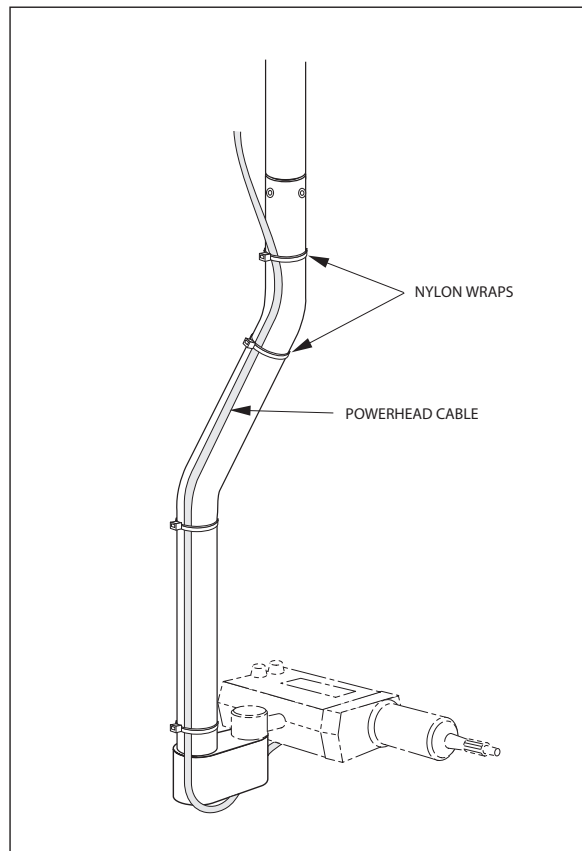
Powerhead and Bracket Attached to Mounting Arm
